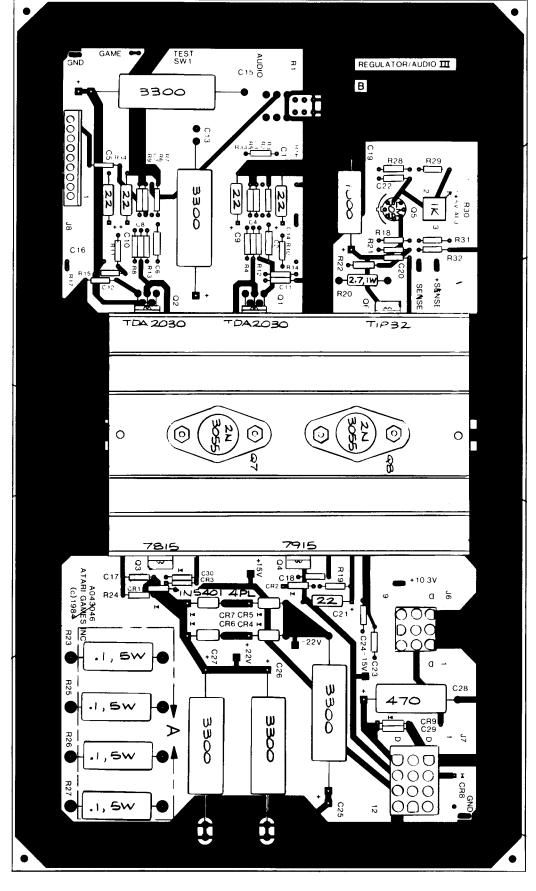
Regulator/Audio III Printed-Circuit Board Assembly A043046-01 C
